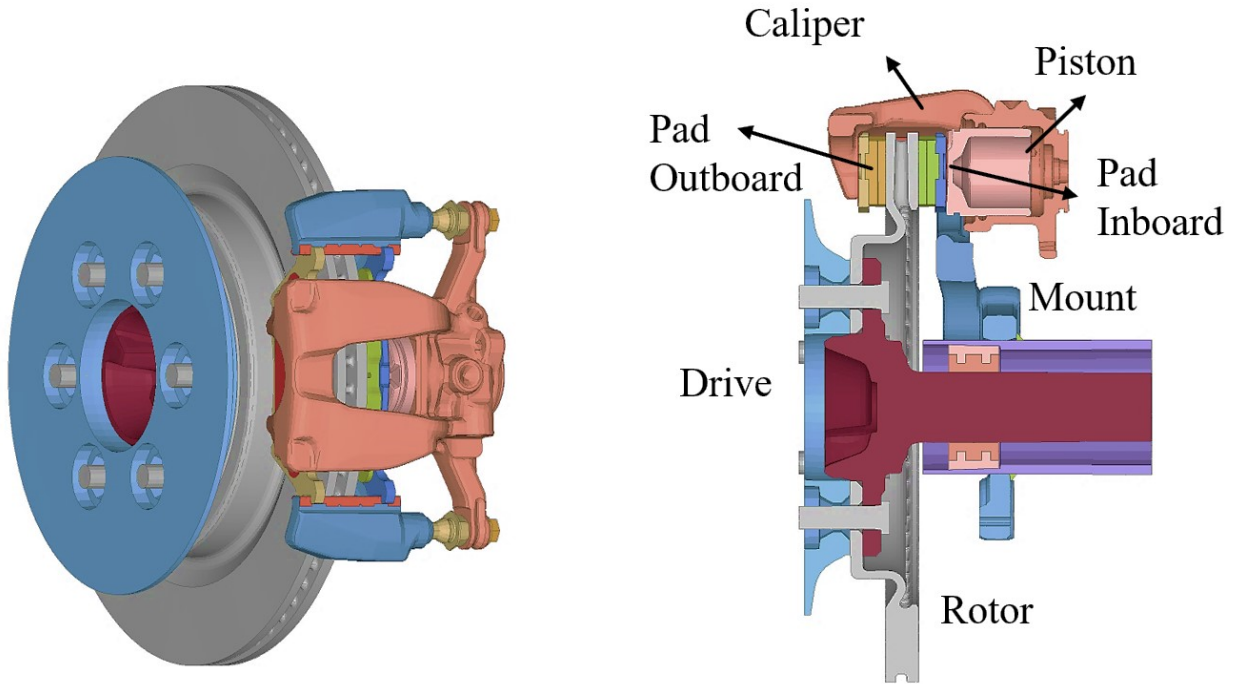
A 3D model of brake assembly in brake squeal analysis
